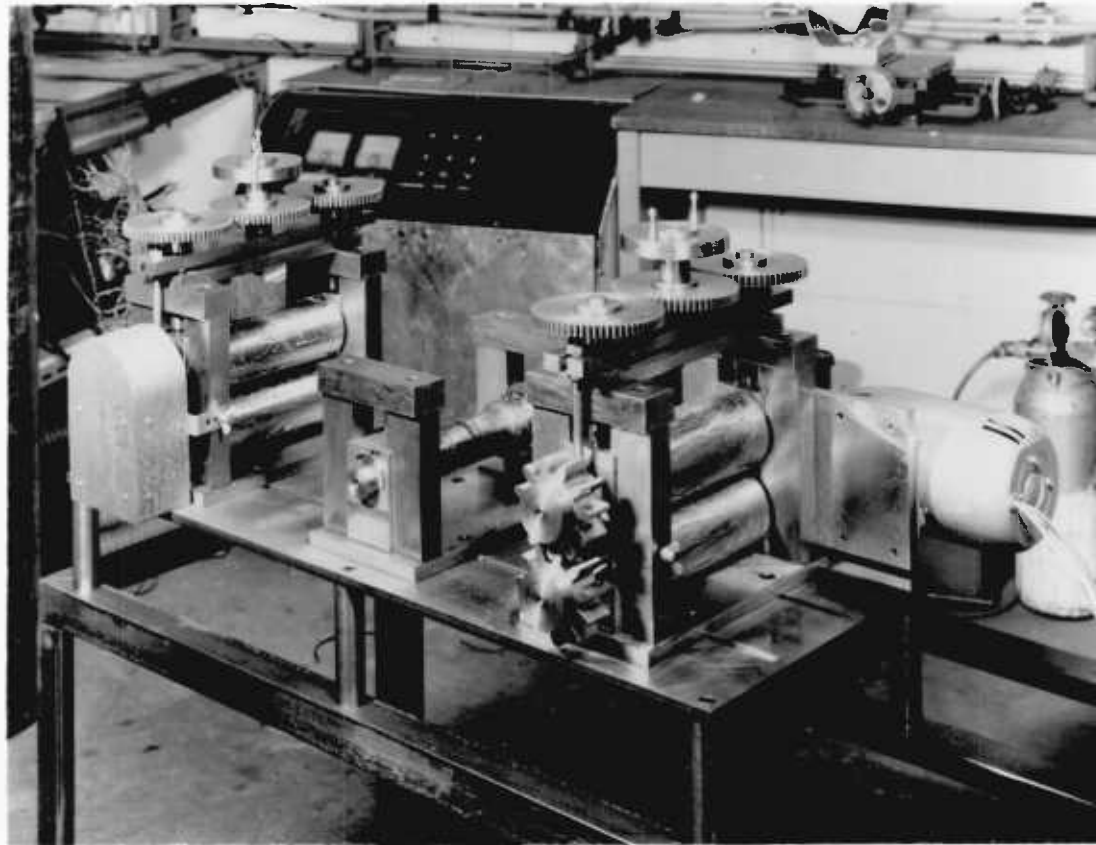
A      Rolling jig for butt welding of thin sheets
